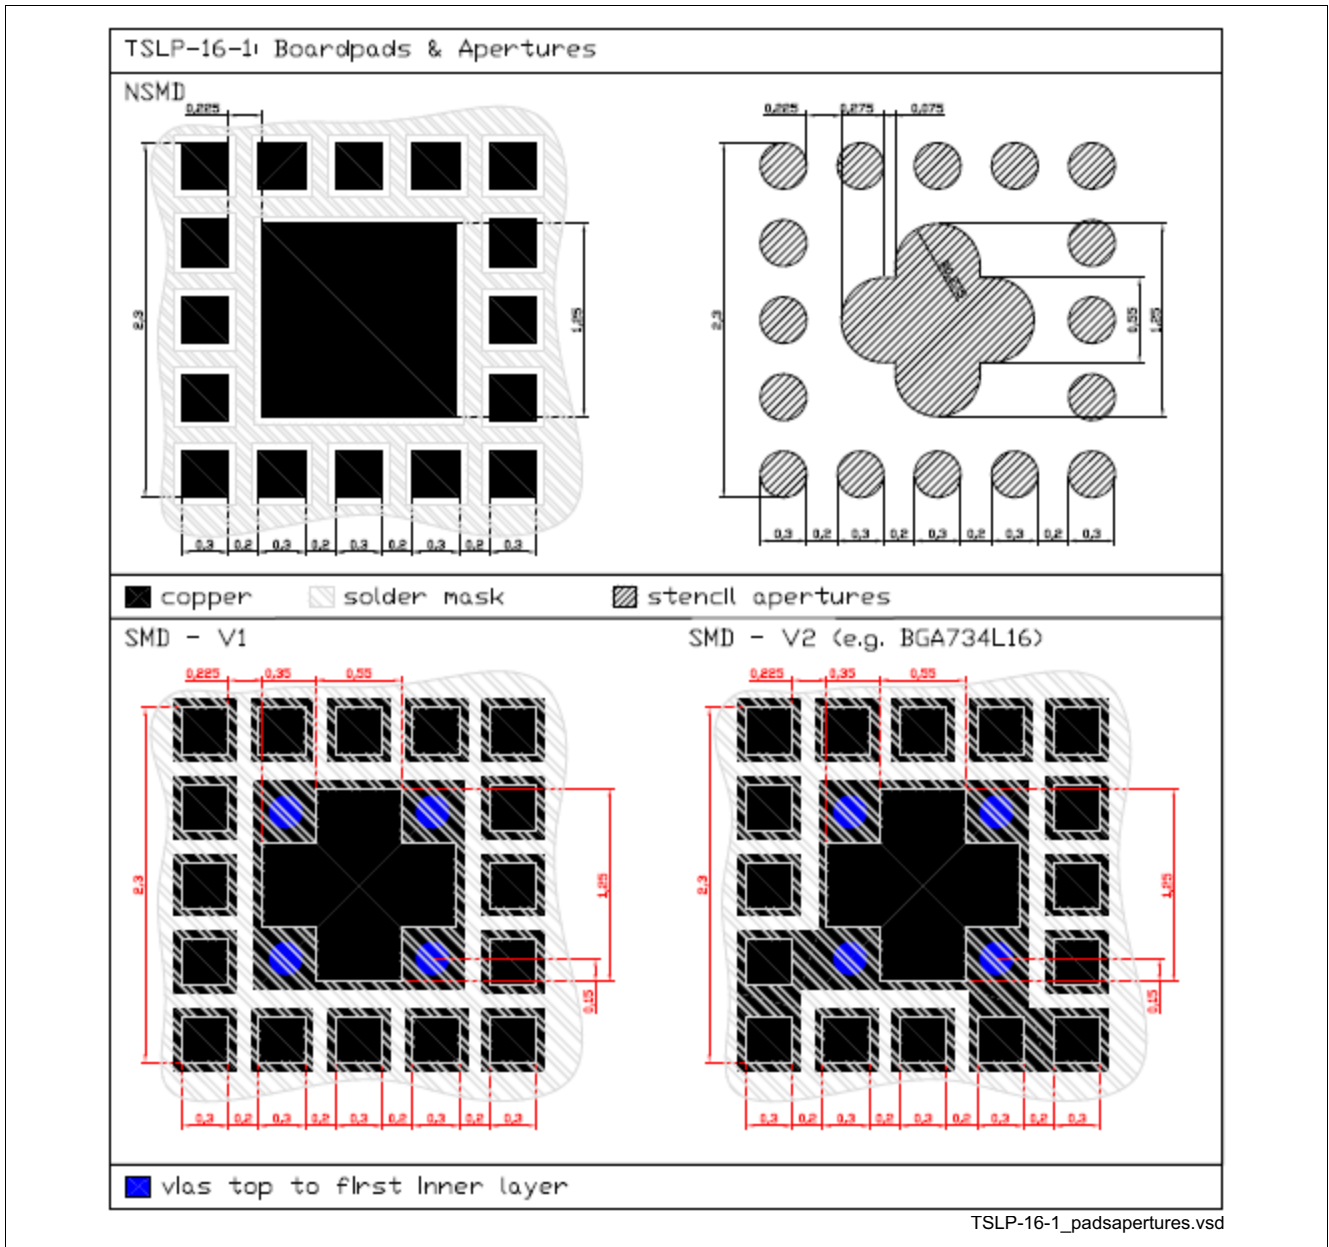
Recommended footprint and stencil layout for the TSLP-16-1 package
